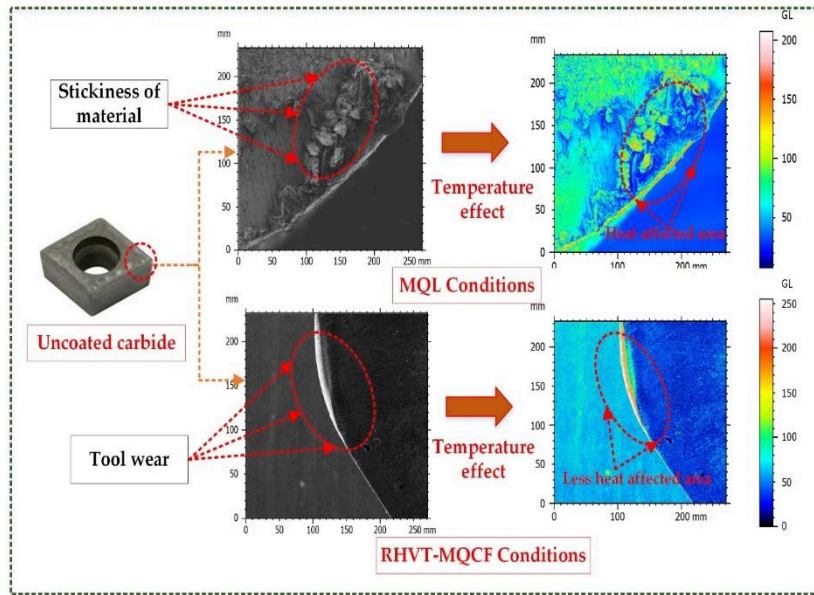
Tool wear mechanism under MQCF and RHVT-MQCF conditions at cutting speed: 300 m/min, feed rate: 0.13 mm/rev & depth of cut: 0.4 mm
